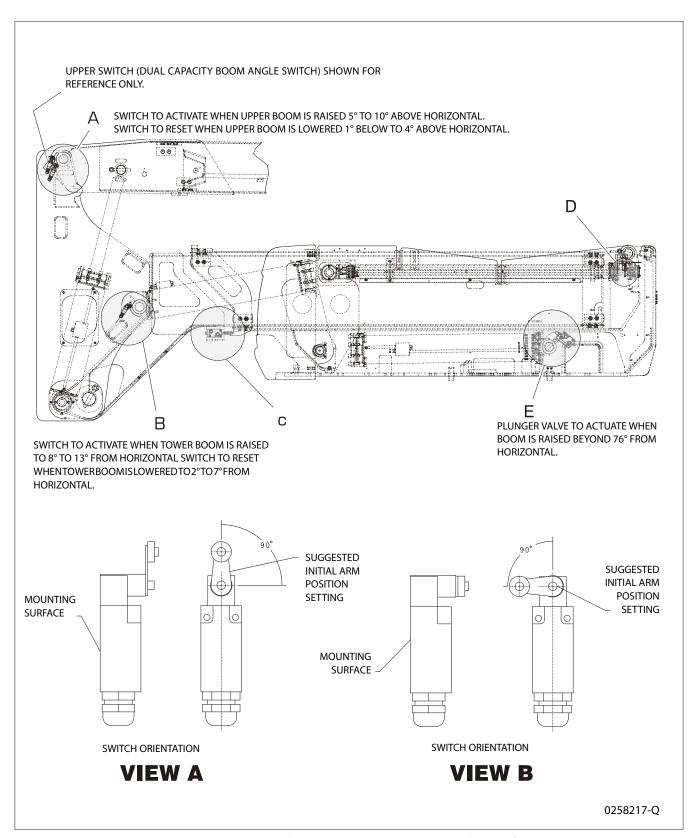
Boom Valve and Limit Switches Location. (Sheet 1 of 3)
